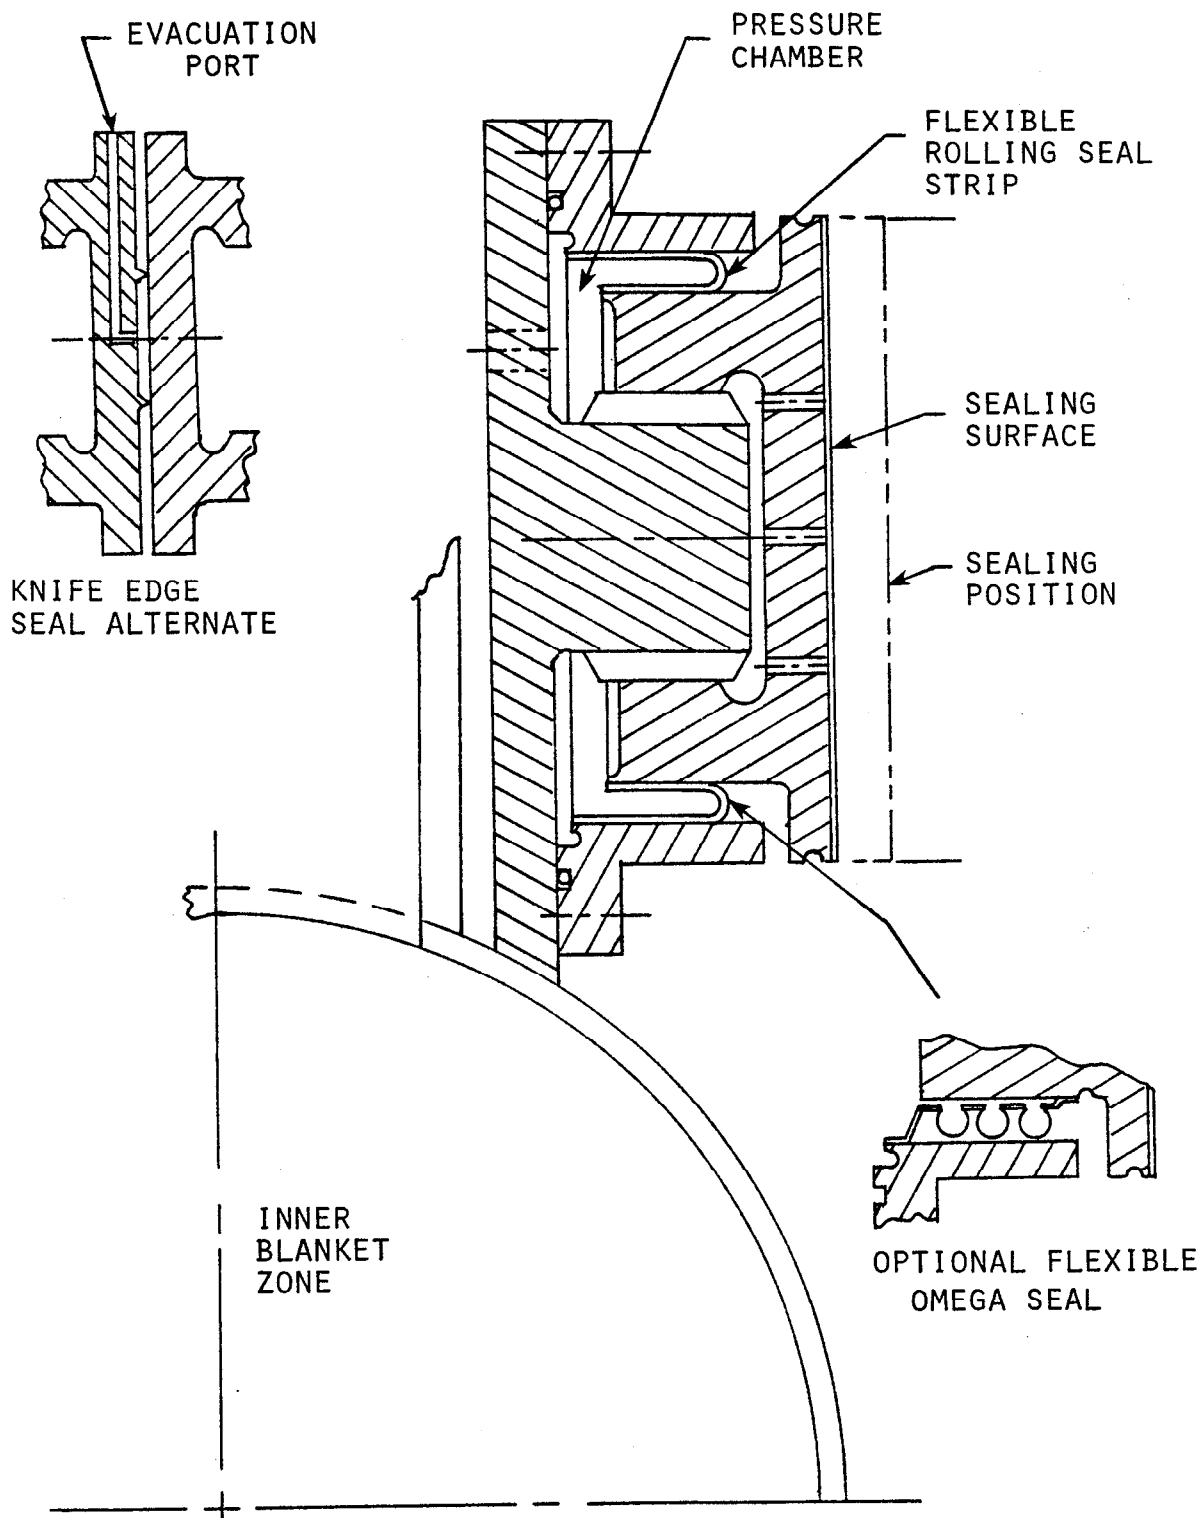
Module interface sealing concept for TMHR liquid metal cooled - molten salt blanket. (See enlarged inset in FIG. IV.B-2.)
